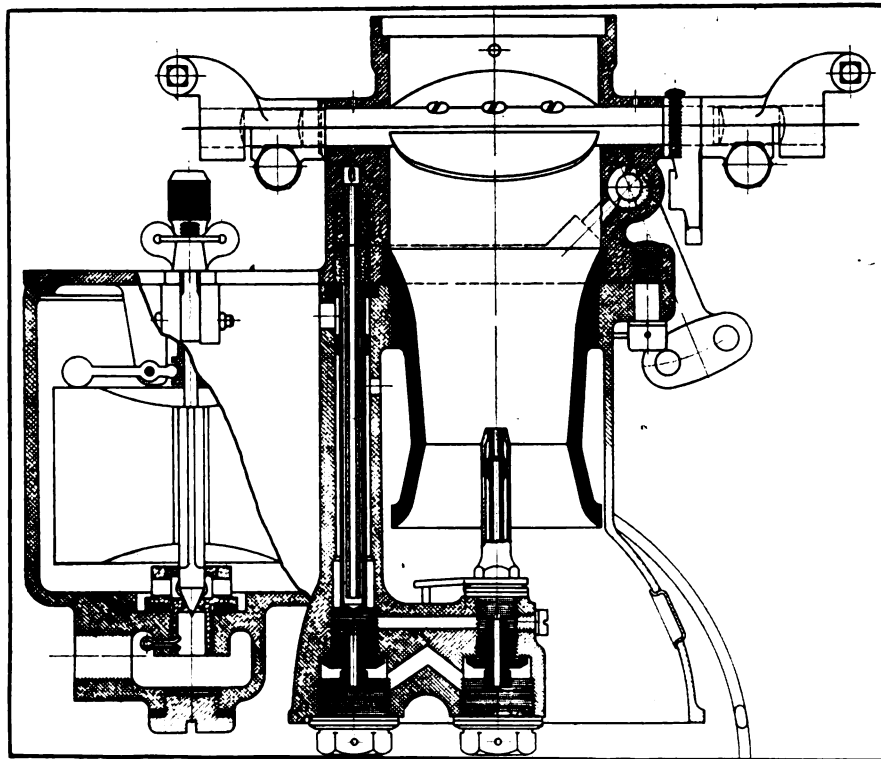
Sectional view of Zenith carburetor, Model U. S. 52.
